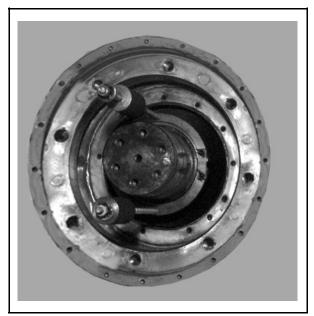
(MSSM0275AE) Shaft Sleeve Tool in Place
